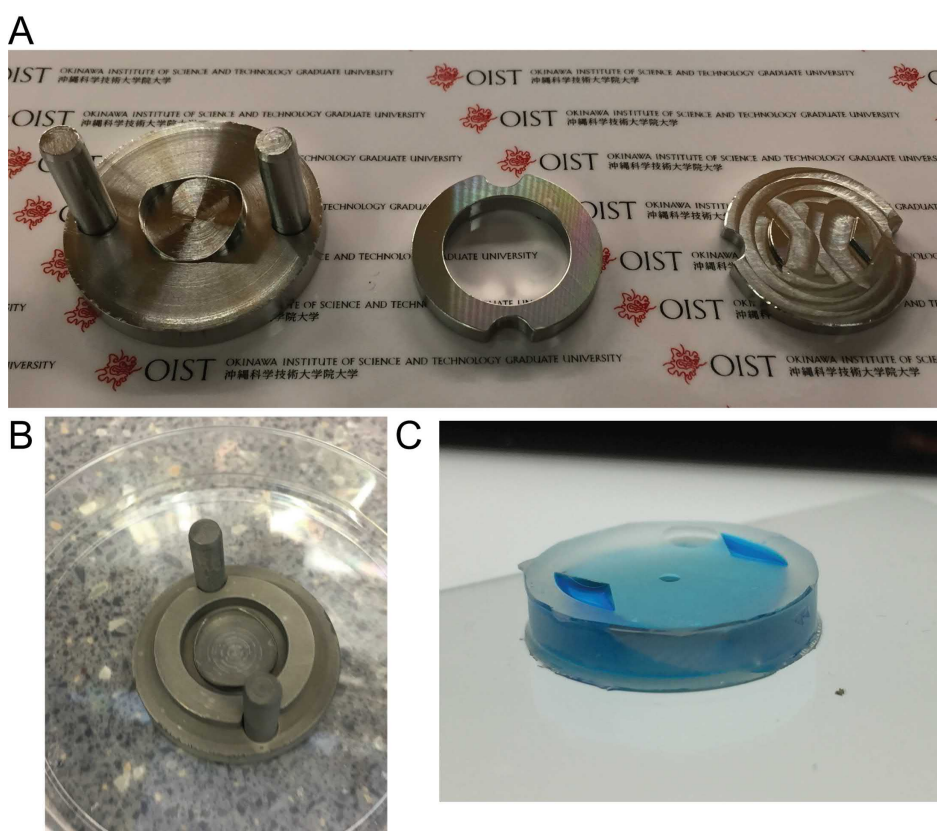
Fabrication of 3D insert by casting PDMS on a CNC machined mold. (A) The CNC milled stainless steel mold on the left with spacing ring in the middle and top lid on the right with current rectifying chambers; (B) The assembled and silanized mold before casting the PDMS and closing the top lid; (C) The casted PDMS device filled with water with blue dye to visualize the CAD structure in the insert.
